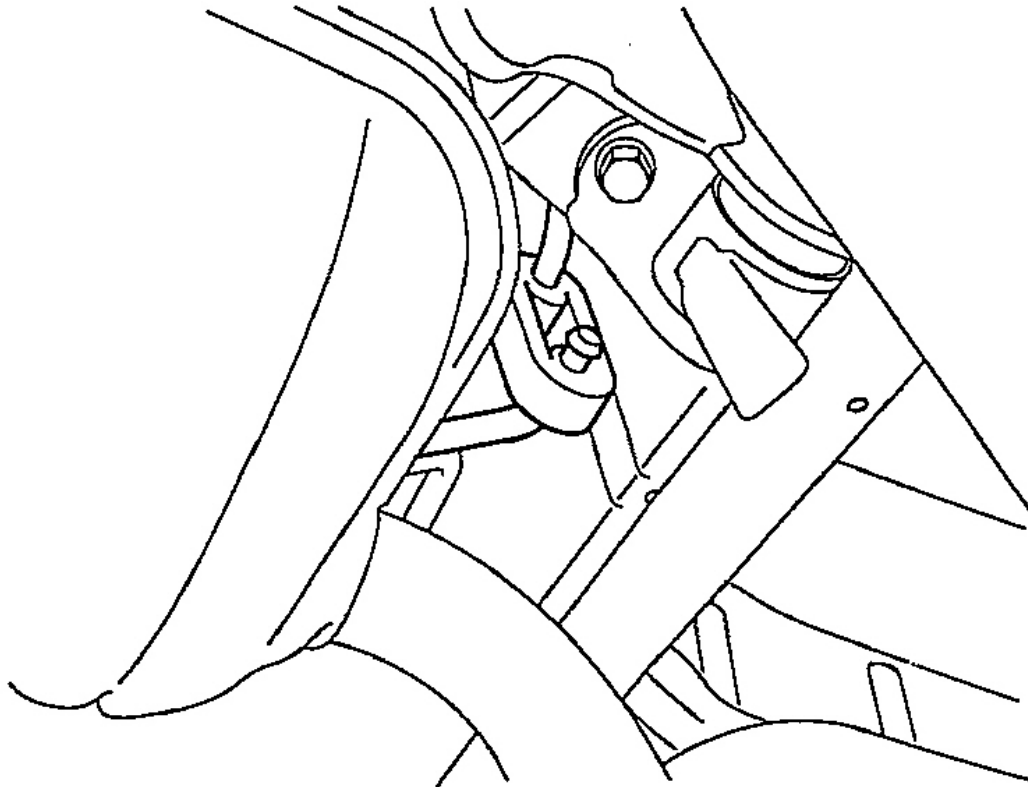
Identifying Front Muffler To Rear Muffler Connection
